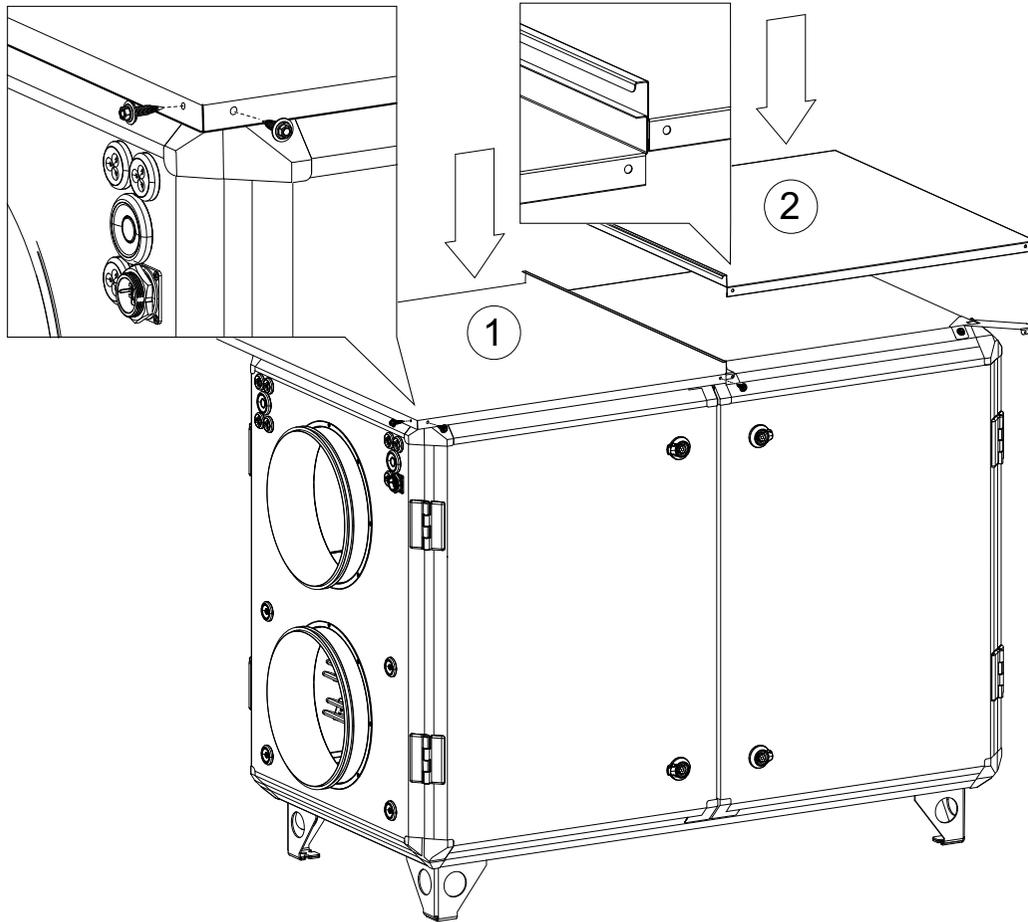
Place the left (1) roof part on top of the air handling unit. Fasten the roof part to the brackets with the screws. Fasten the right roof part (2), observing the bending on the inner edge of the right roof part.
